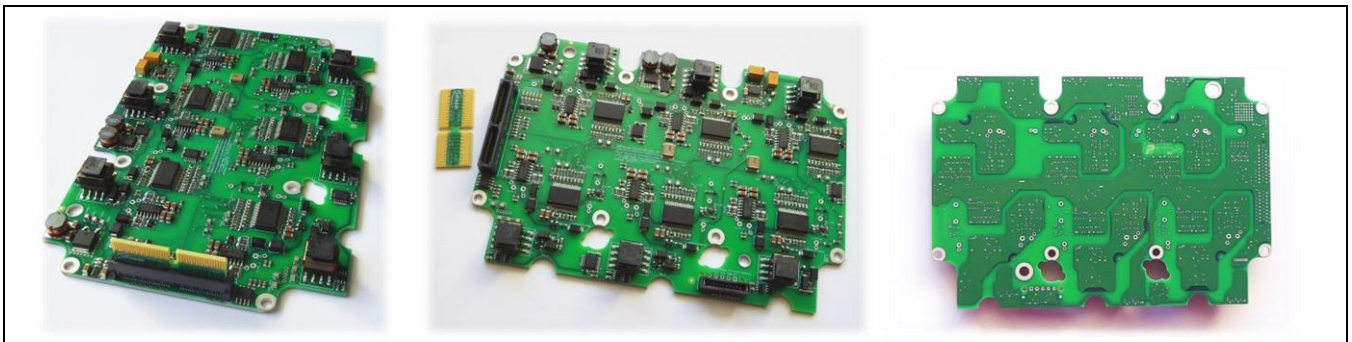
Typical appearance of the gate driver evaluation board EVAL-6ED100HPDRIVE-AS (SP001386654) from side, top and bottom view.
